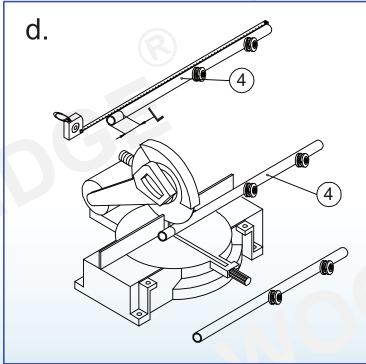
FOR EXAMPLE If your wall opening W=71". Your shower model is 72". L=72"-71"=1", You have to cut 1" off from the rail. 2. Your Upper Guide Rail (1) has been precut for your Shower model opening width: 72" for shower width. If W-width of your wall-to-wall opening is equal to the size of your shower model, it is unnecessary to cut the Upper Guide Rail and you can continue to Step 3. If W-width of your wall-to-wall opening is less than the size of your Shower model, you will need to cut the Upper Guide Rail from the end which is farther from the Glass brackets (4) holes.
